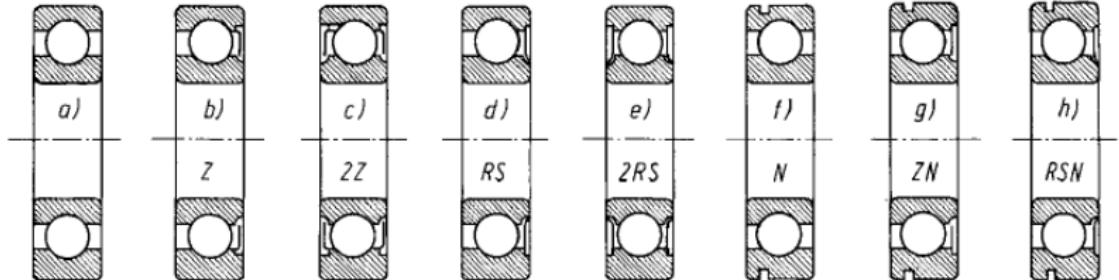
Types of deep groove ball bearings (DIN 625) [5].
